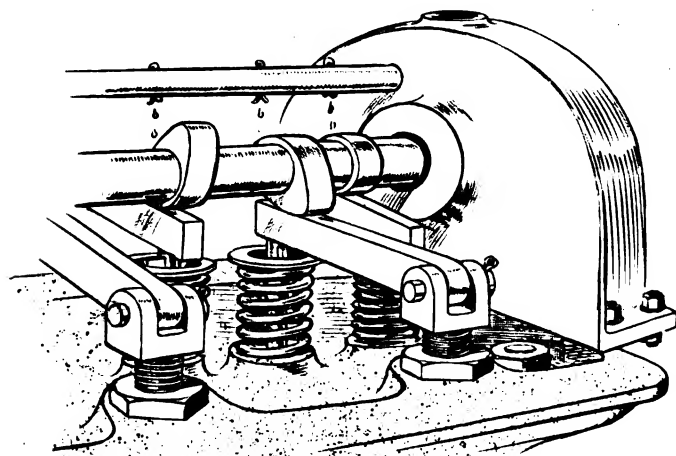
CAM MECHANISM ON THE RHODE, A BRITISH LIGHT CAR HAVING A FOUR-CYLINDER ENGINE
